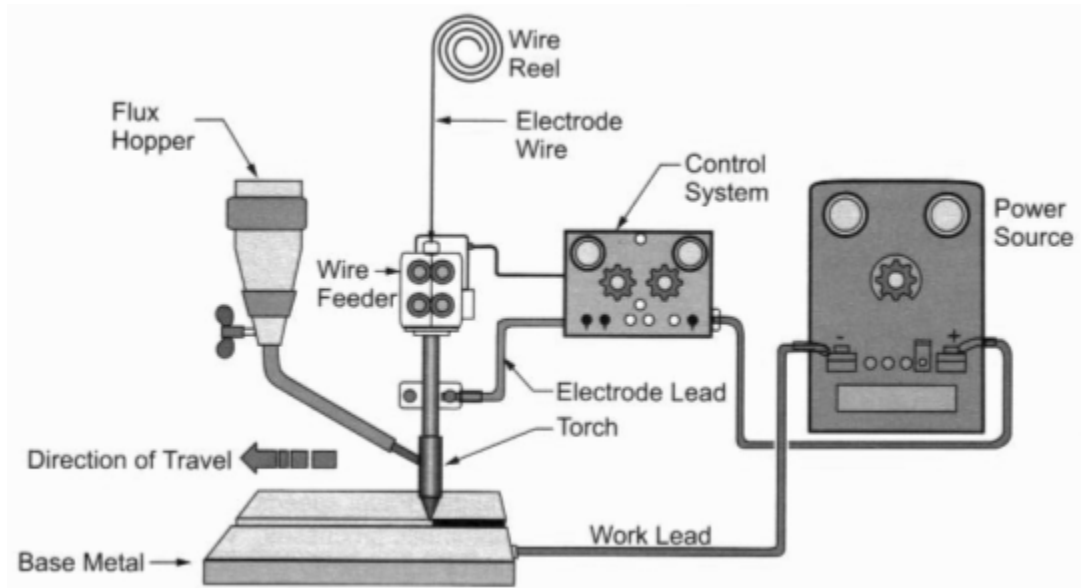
Equipment set-up for single wire submerged arc welding [17].
